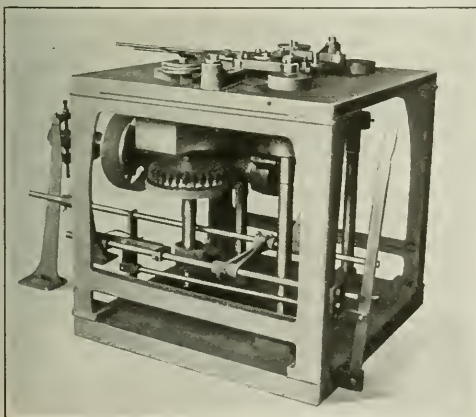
Tube-bending Machine built by the Davis-Bournonville Co.
